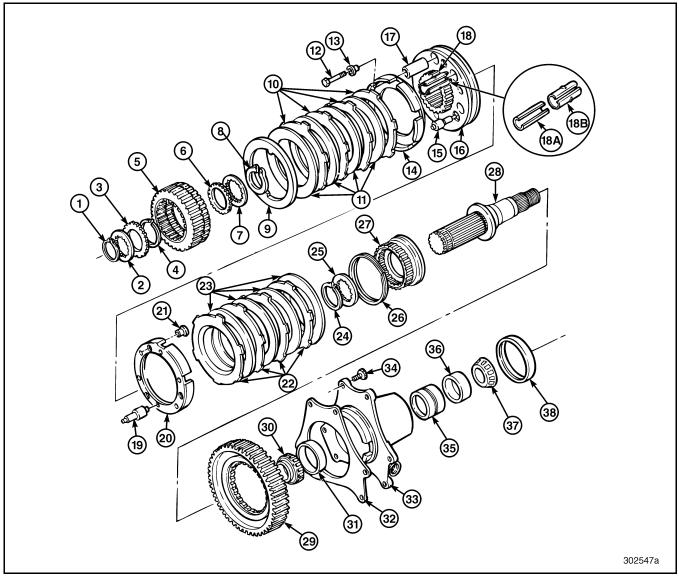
Exploded View of: T313–T318(L)(LR) Rear Mainshaft and Synchronizer Assembly
